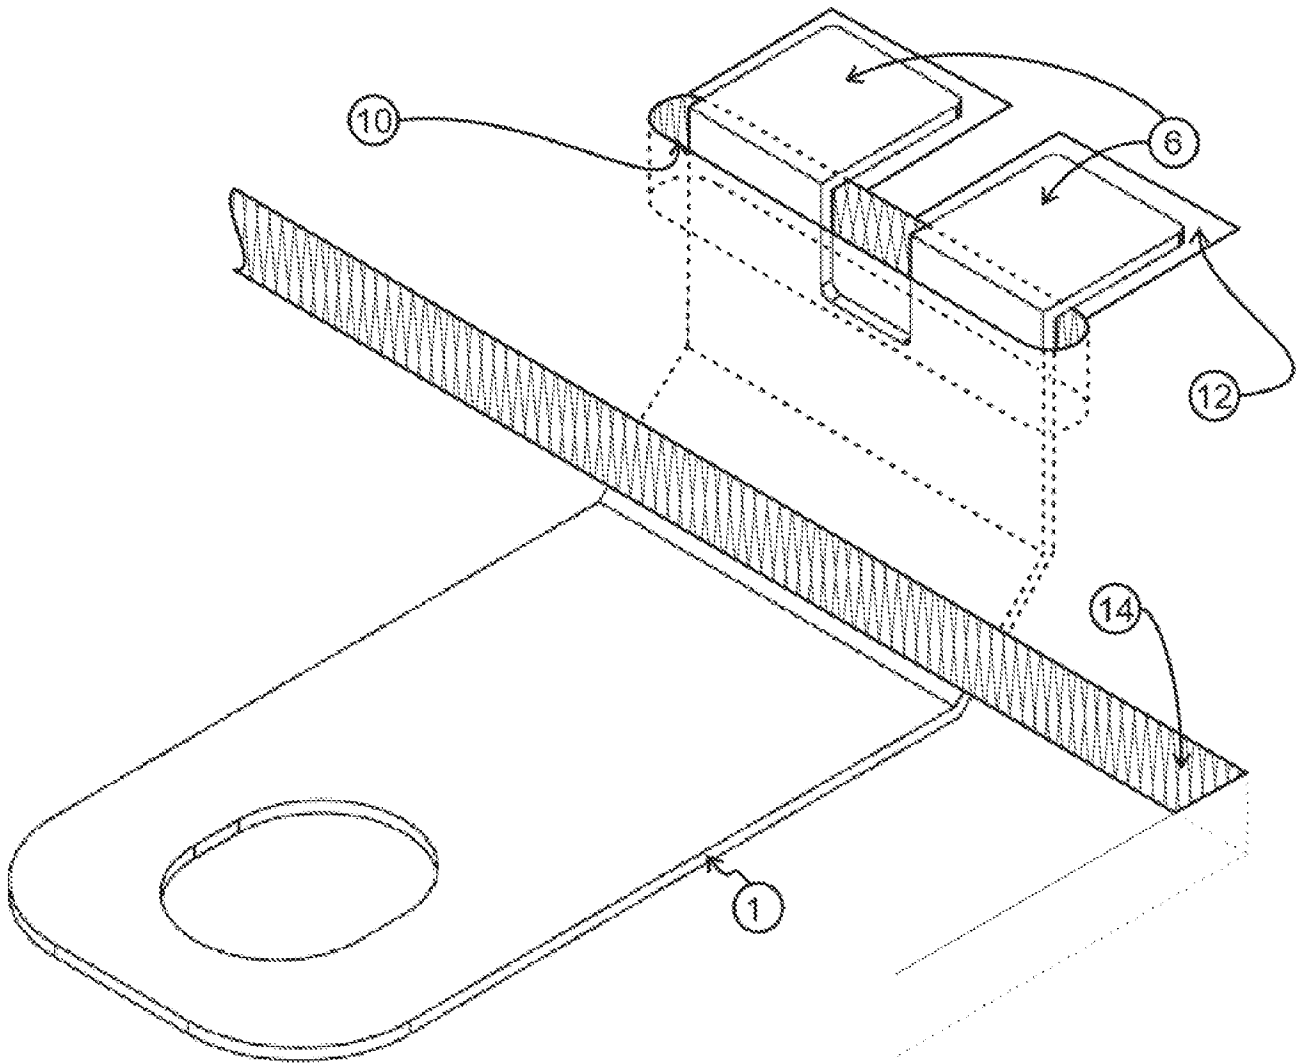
FLEXIBLE BATTERY CELL SENSING TERMINAL - MOUNTED ON PCB
